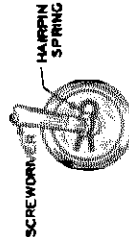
Putting a Hair Spring on a Push Button Shaft
